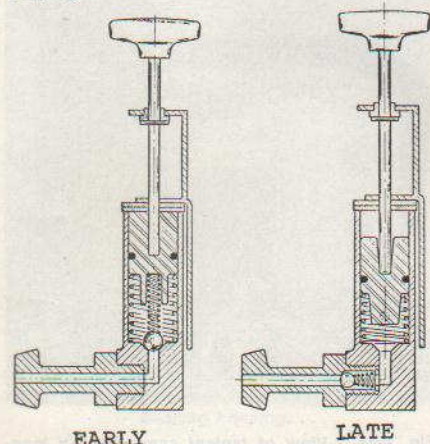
Cross section of early and late type manual oiler pumps. Most saws are equipped with late type.
